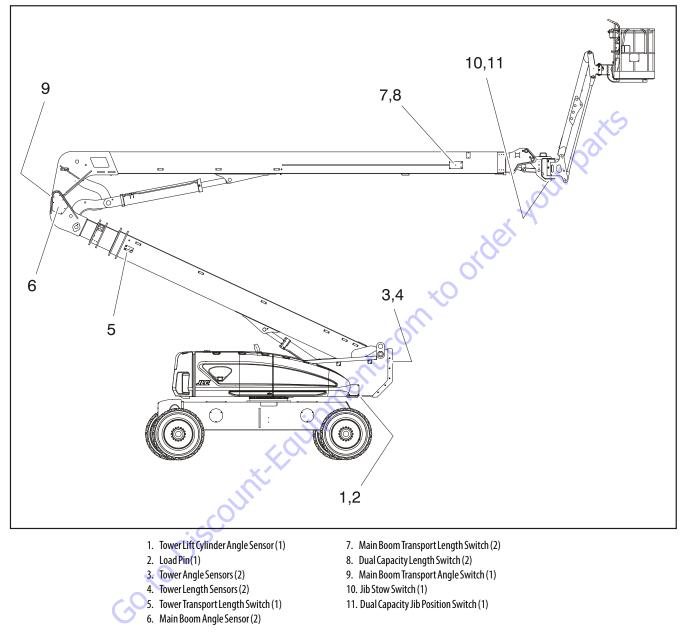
Boom Sensor Locations Overall View - Sheet 1 of 2
